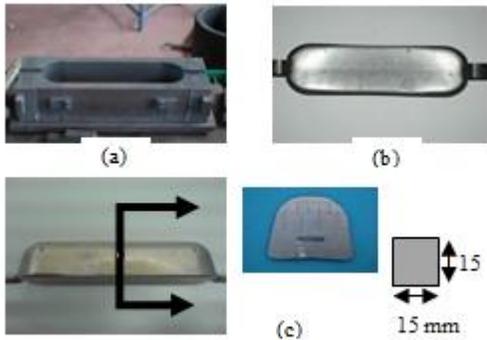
(a) Cast iron mold (b) Aluminium casting product (c) Cutting part
